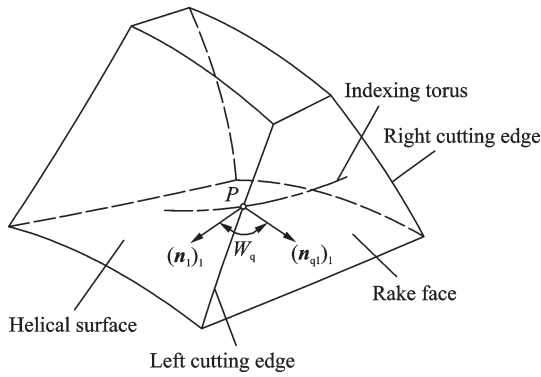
Angle between tooth surfaces at a point on tooth cutting edge
